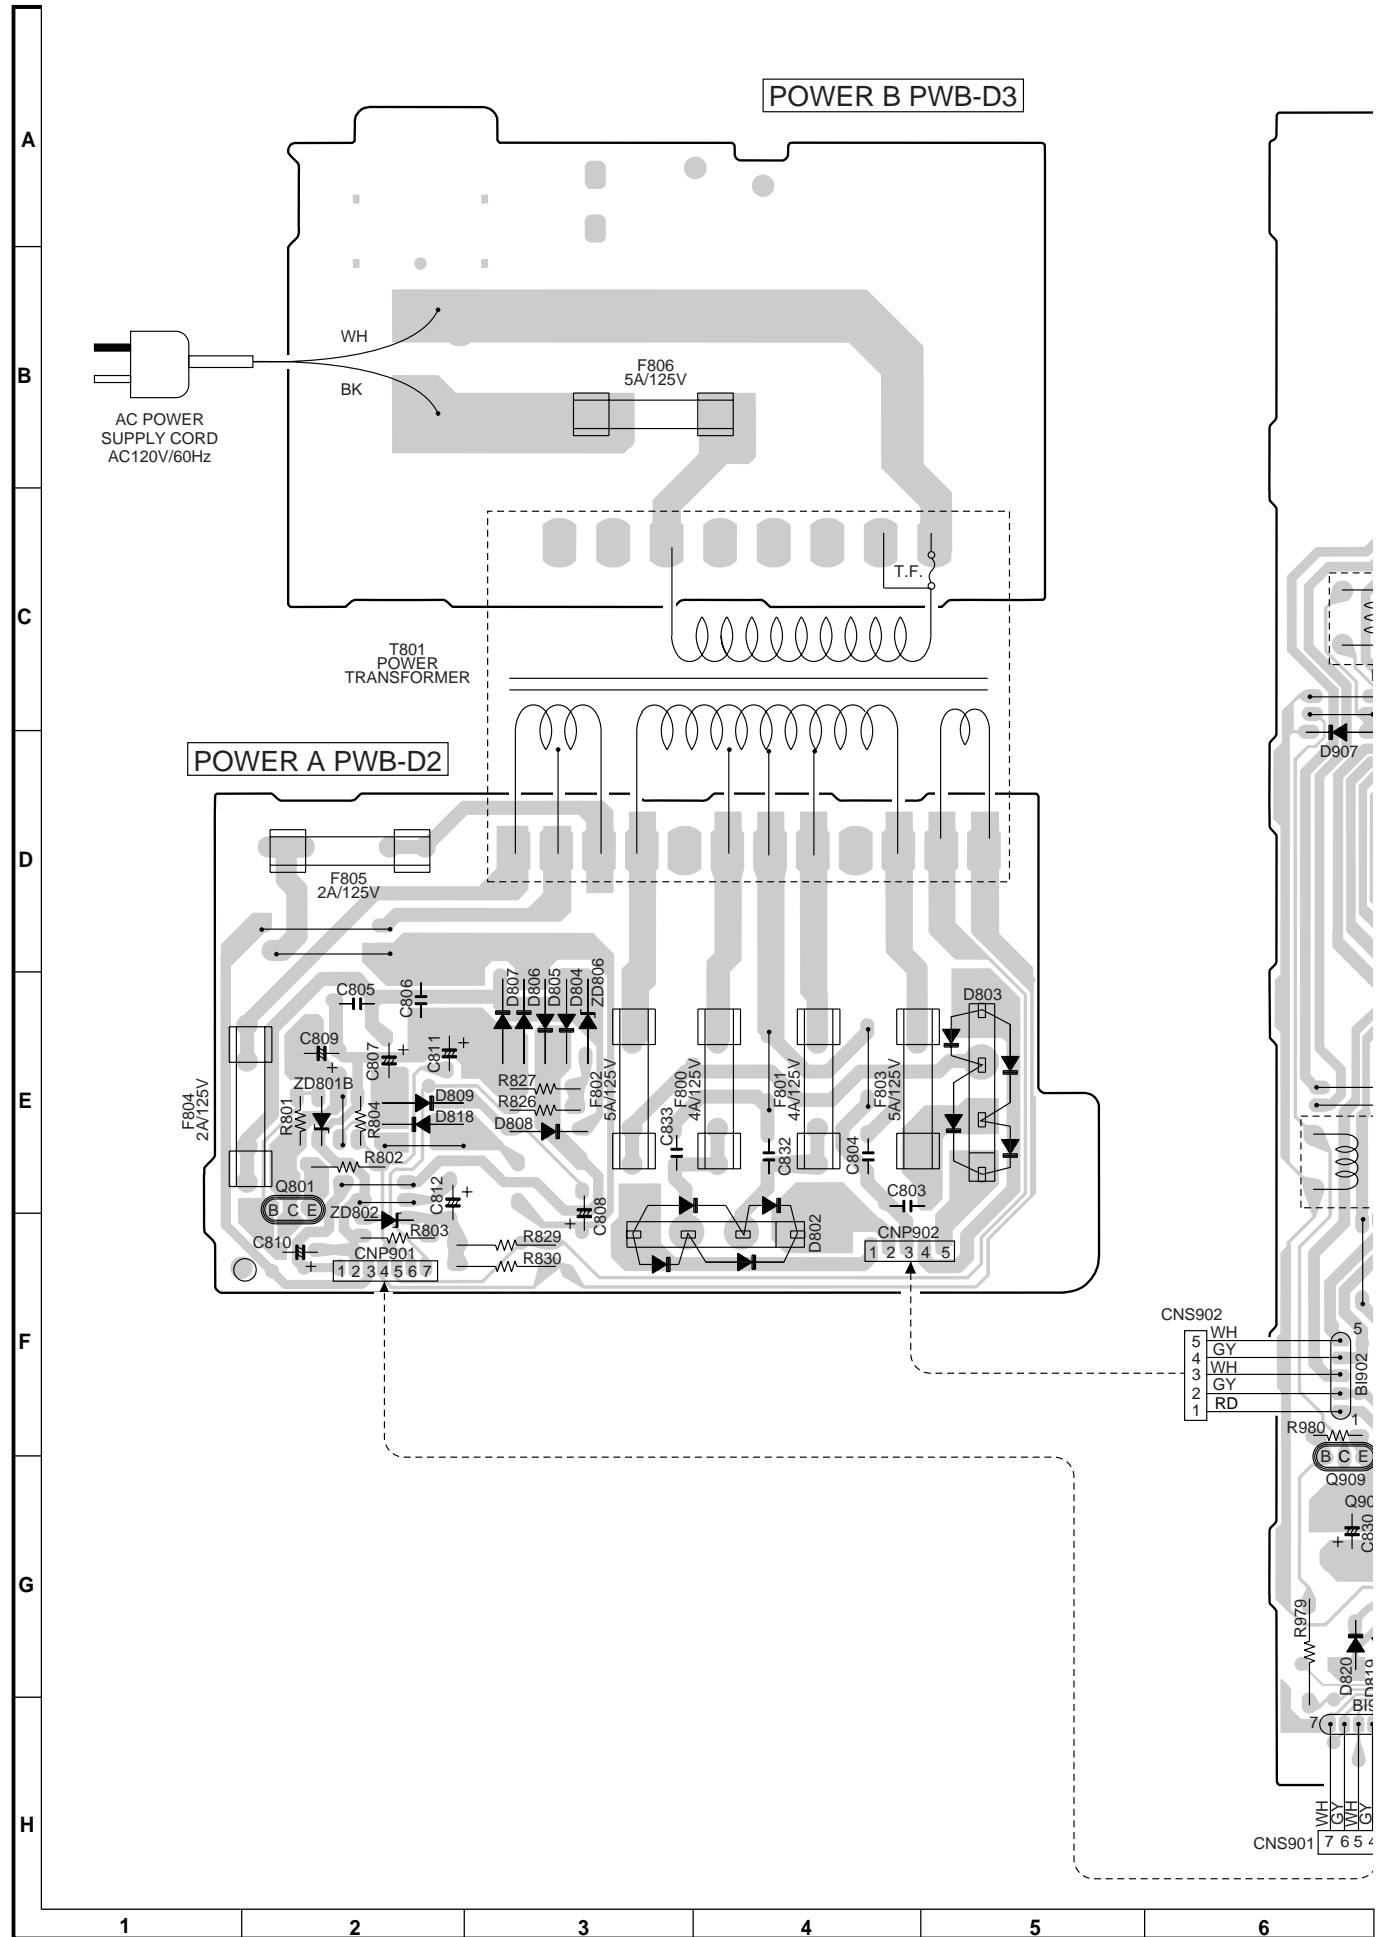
WIRING SIDE OF P.W.BOARD (5/9)
